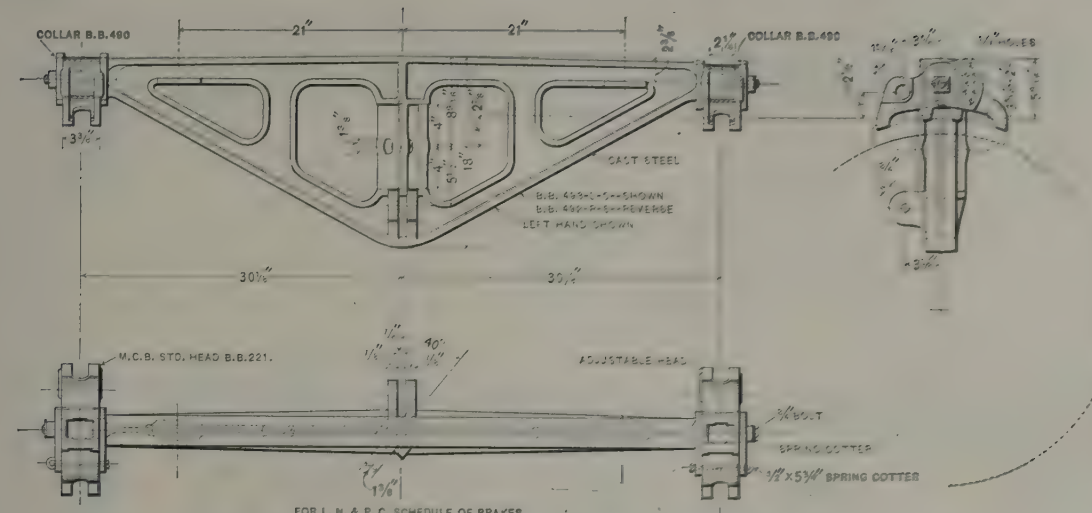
Vulcan Cast Steel Brake Beam. American Steel Foundries.
